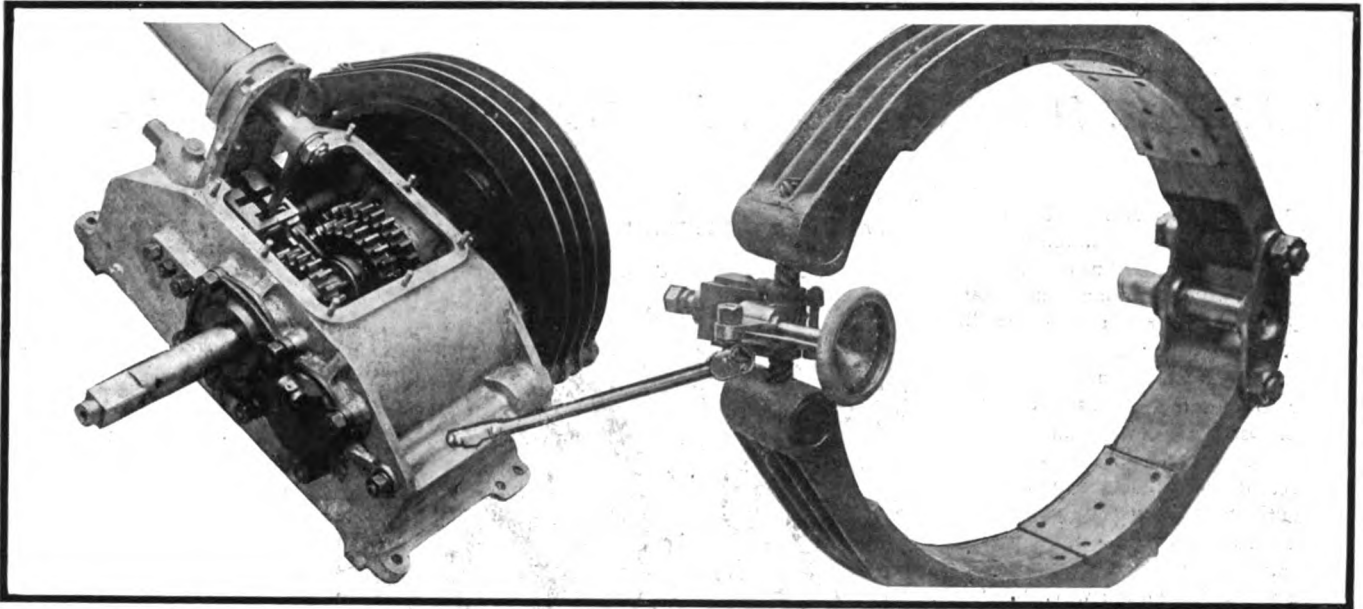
Peugeot gearbox and brake, the former with its entire selective mechanism inclosed. All parts are protected from stones
